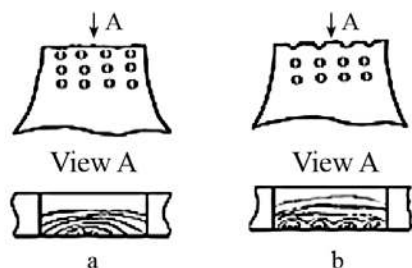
Diagram of surface and fracture of samples with dimples, destroyed by fretting fatigue: a – destruction outside dimples; b – destruction within dimples
